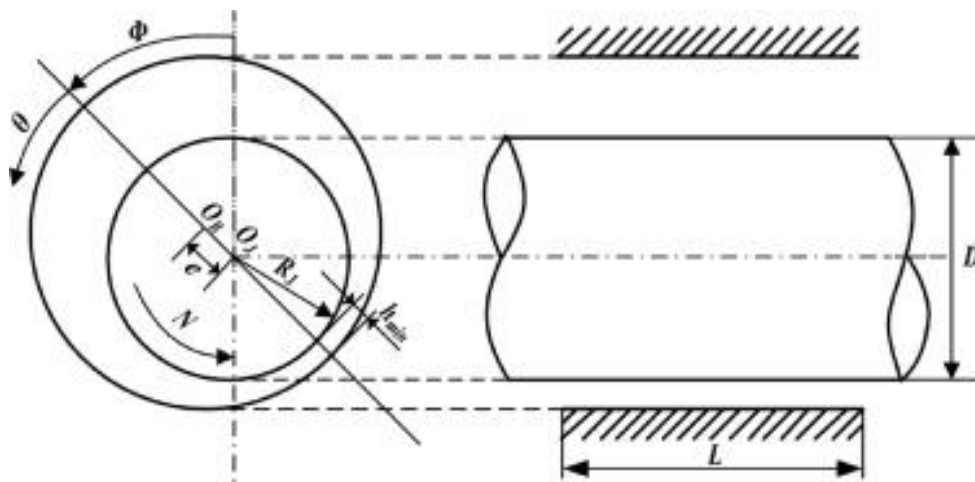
Basic Nomenclature of the journal bearing assembly
